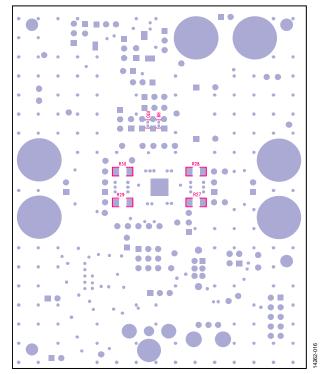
SSM3582 Evaluation Board Bottom Silkscreen
